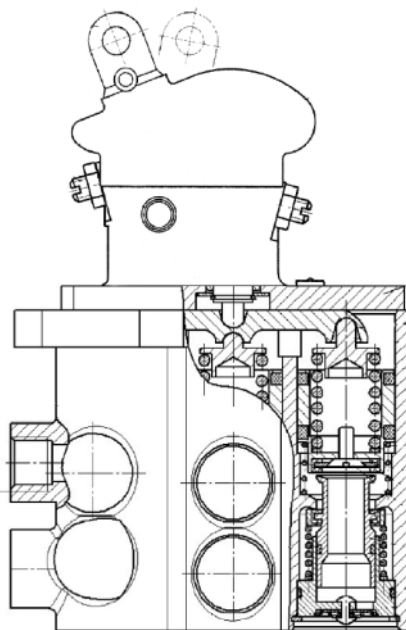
Cross-section of a three-section brake valve that is manufactured at the Public Joint-Stock Company Volchansk Aggregate Plant
